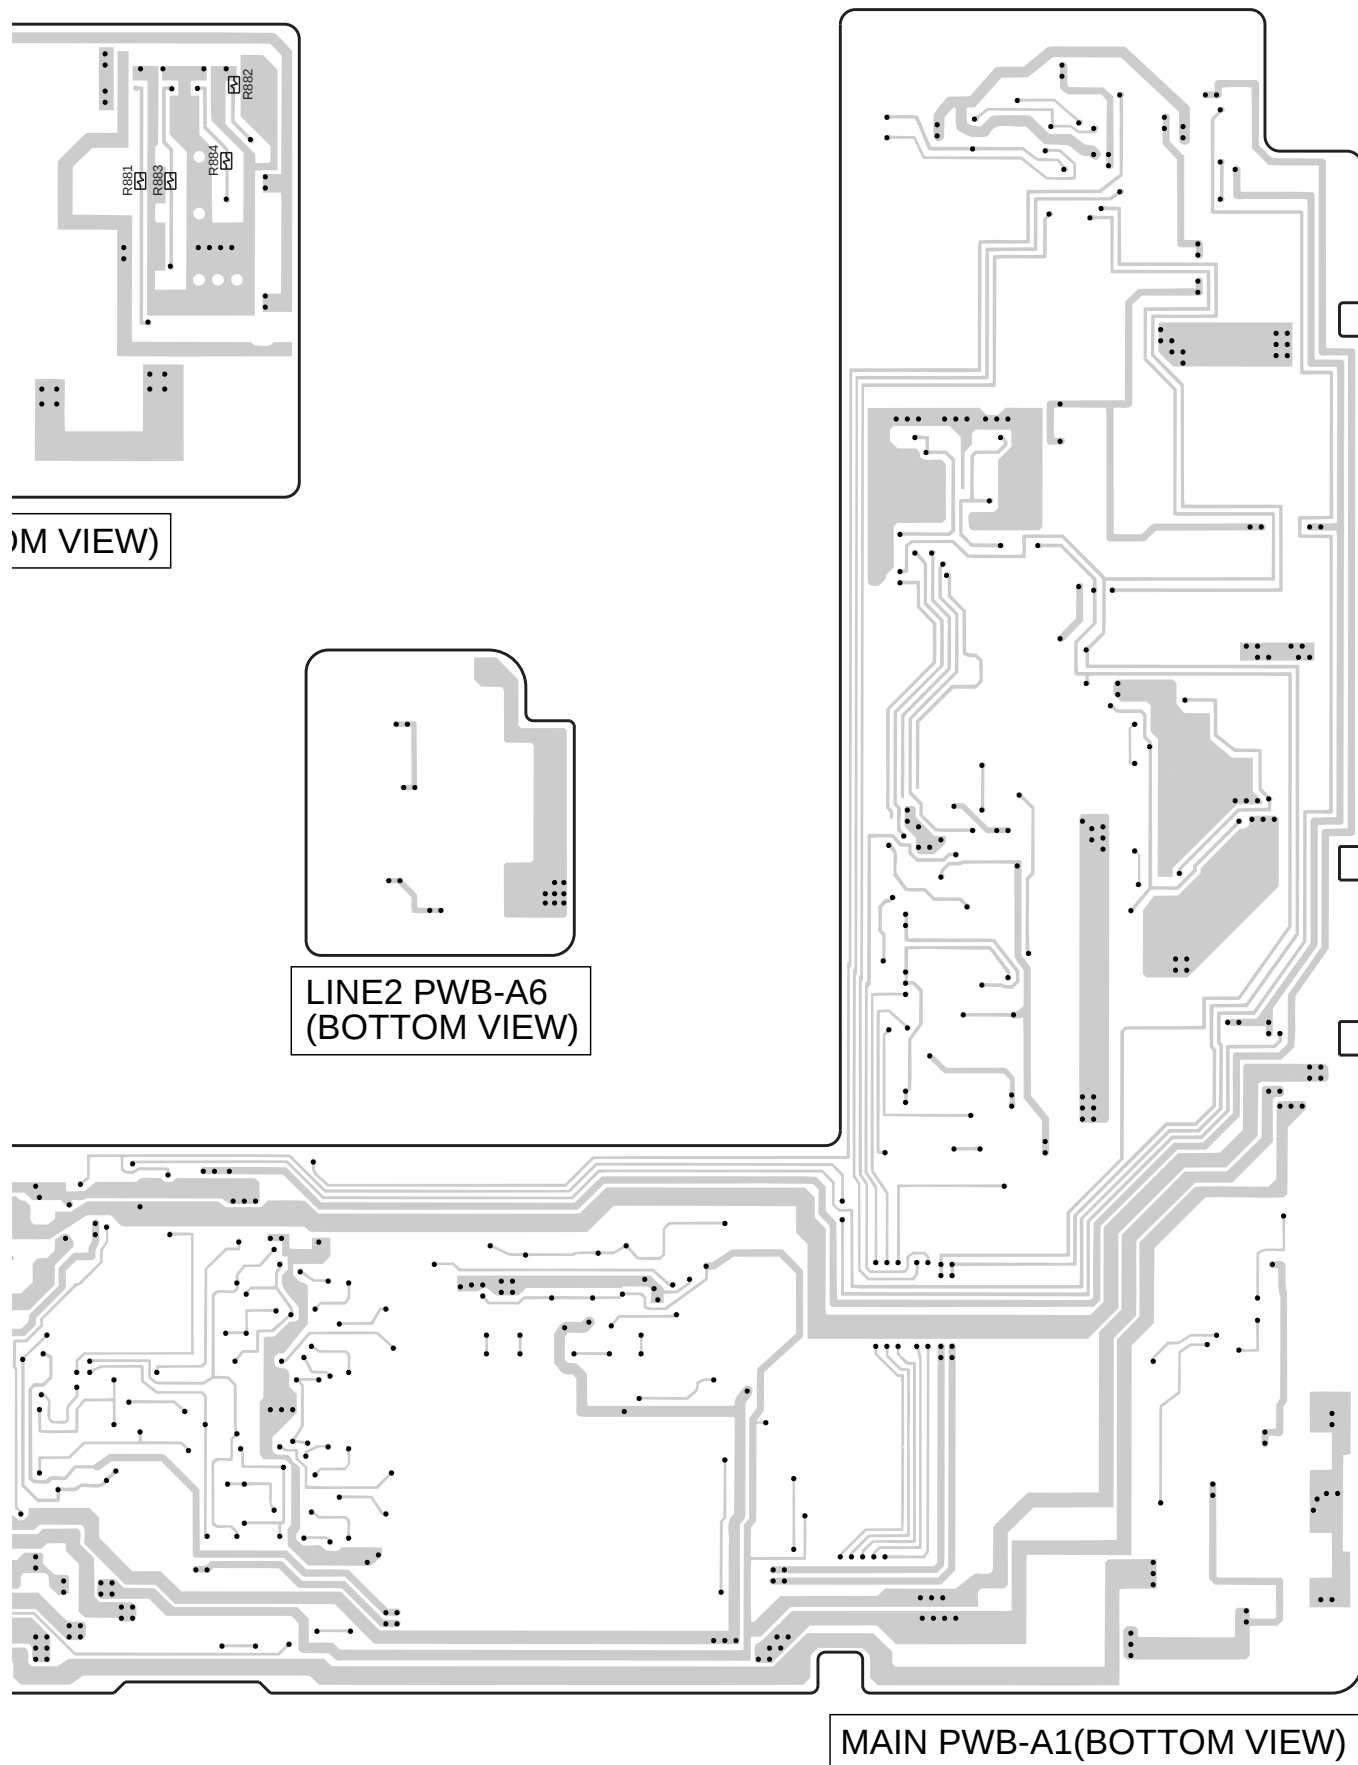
WIRING SIDE OF P.W.BOARD (3/14)
